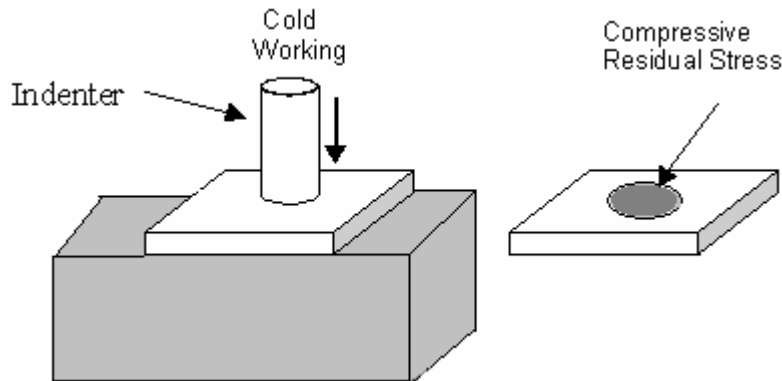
COLD WORKING ON SPR SPECIMENS.
